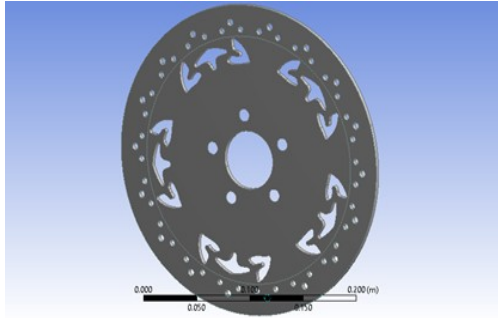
CAD LAYOUT OF THE DISC ROTOR
